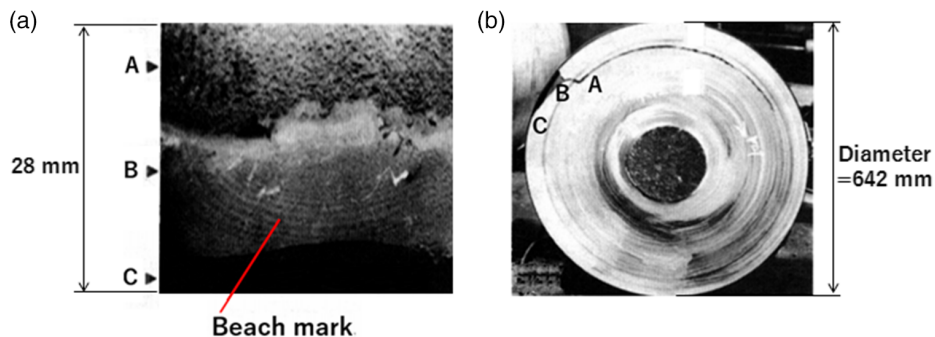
Boundary failure where the crack originated at grain/FC boundary in bimetallic work roll and propagates toward the surface. a) Fractured surface, A: Near boundary, B: Shell with beach mark, C: Roll surface, b) cross-sectional view of spalling crack Reproduced with permission.^[20] Copyright 1987, The Iron and Steel Institute of Japan.
